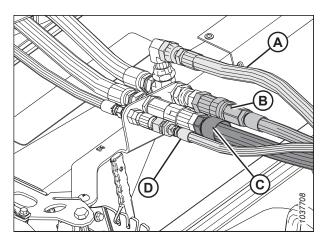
Windrower Hydraulic Hoses Connected to Header – View from Rear of Header
